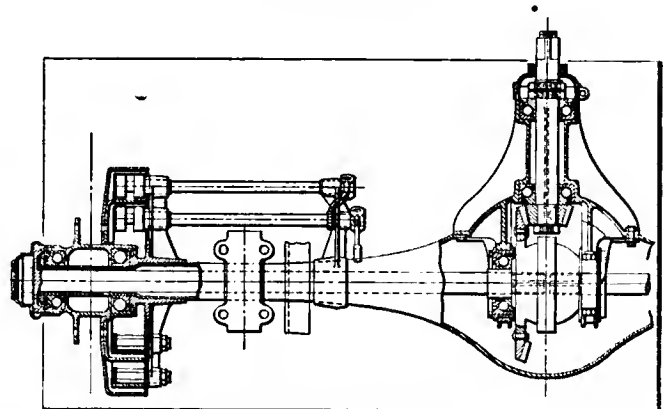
McCord full floating live rear axle with annular type ball bearings and parts of drop forged steel
